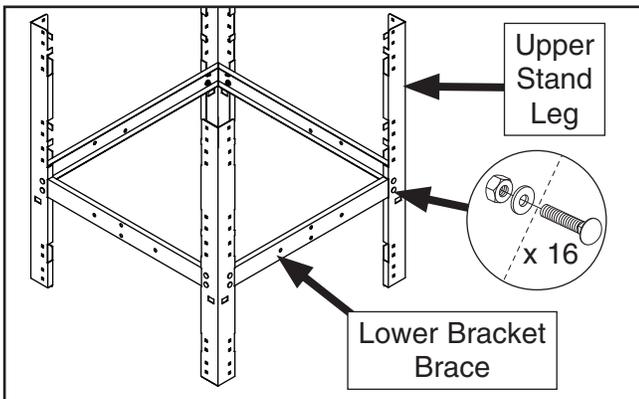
Initial assembly of upper stand legs connected to lower bracket braces.
